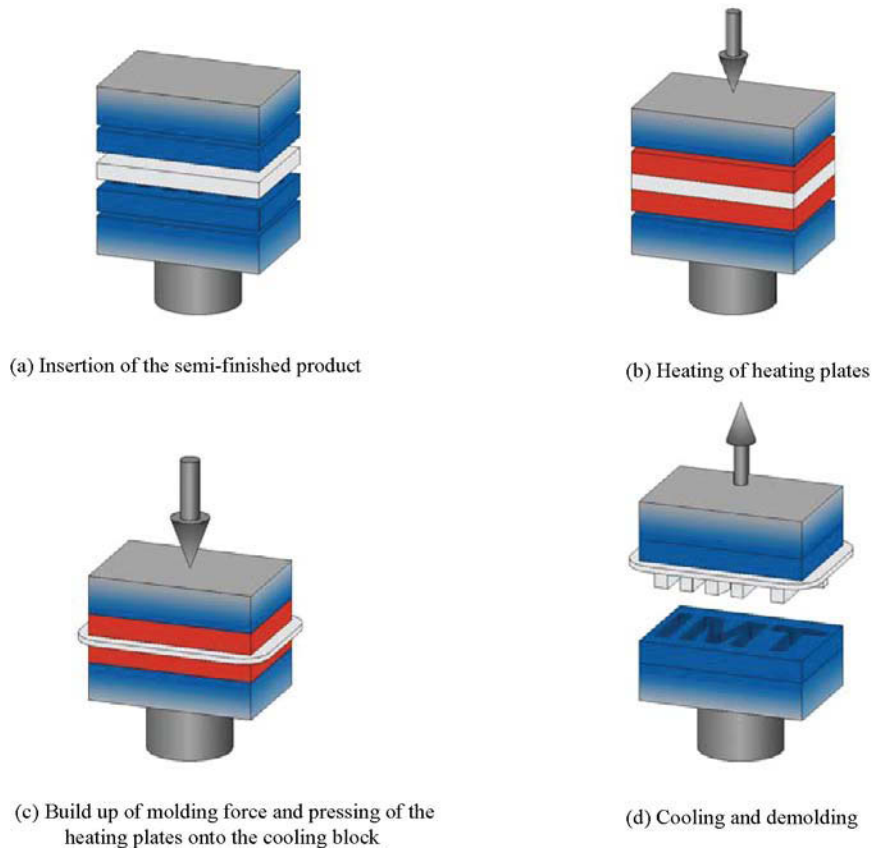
Schematic view of the process steps of hot embossing with the basic molding tool.
